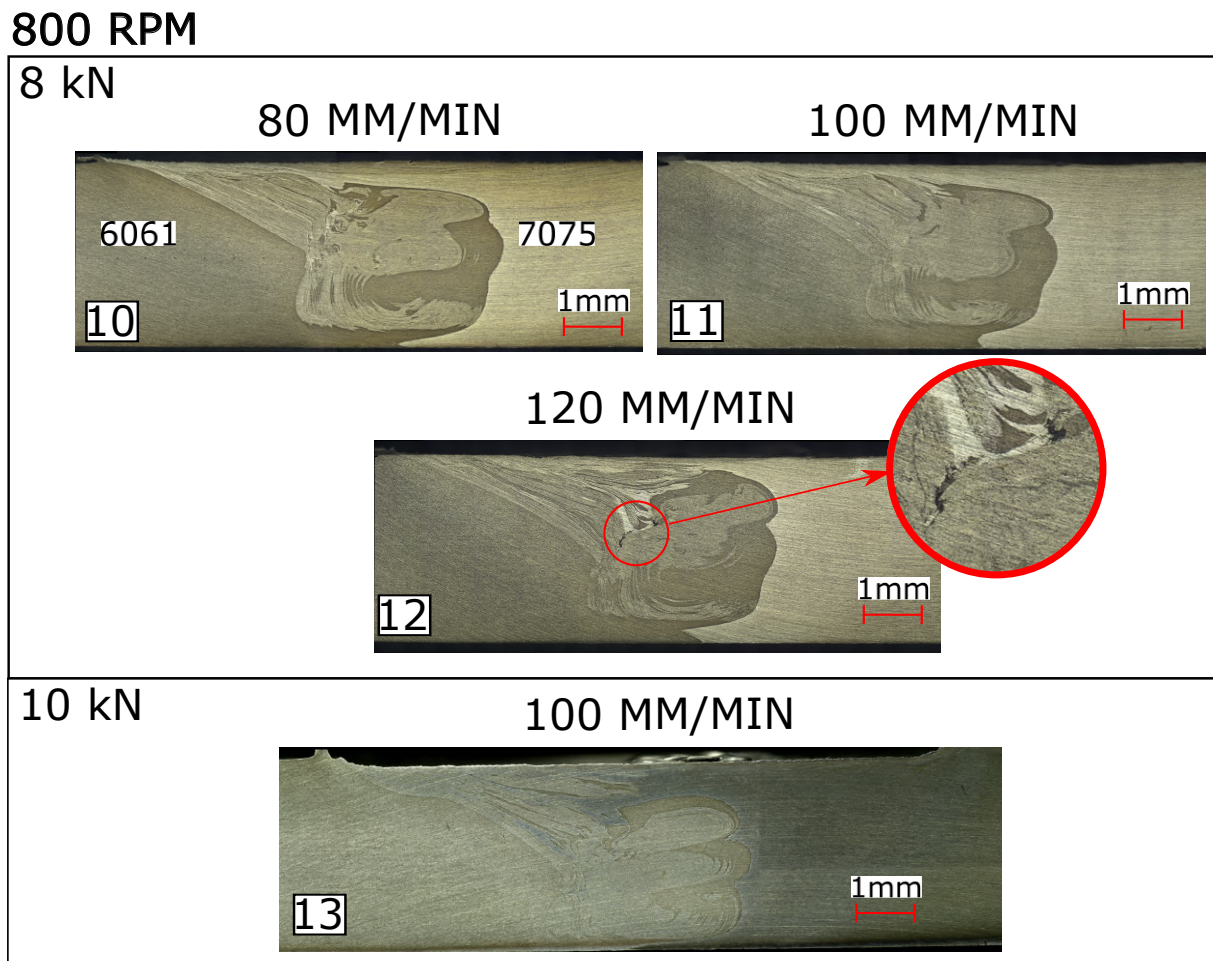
Macrographs of dissimilar AA6061/AA7075 FSW joints performed at 800 RPM. Two different axial loads have been tested. On weld 12, a red circle highlights a small defect known as "wormhole".
